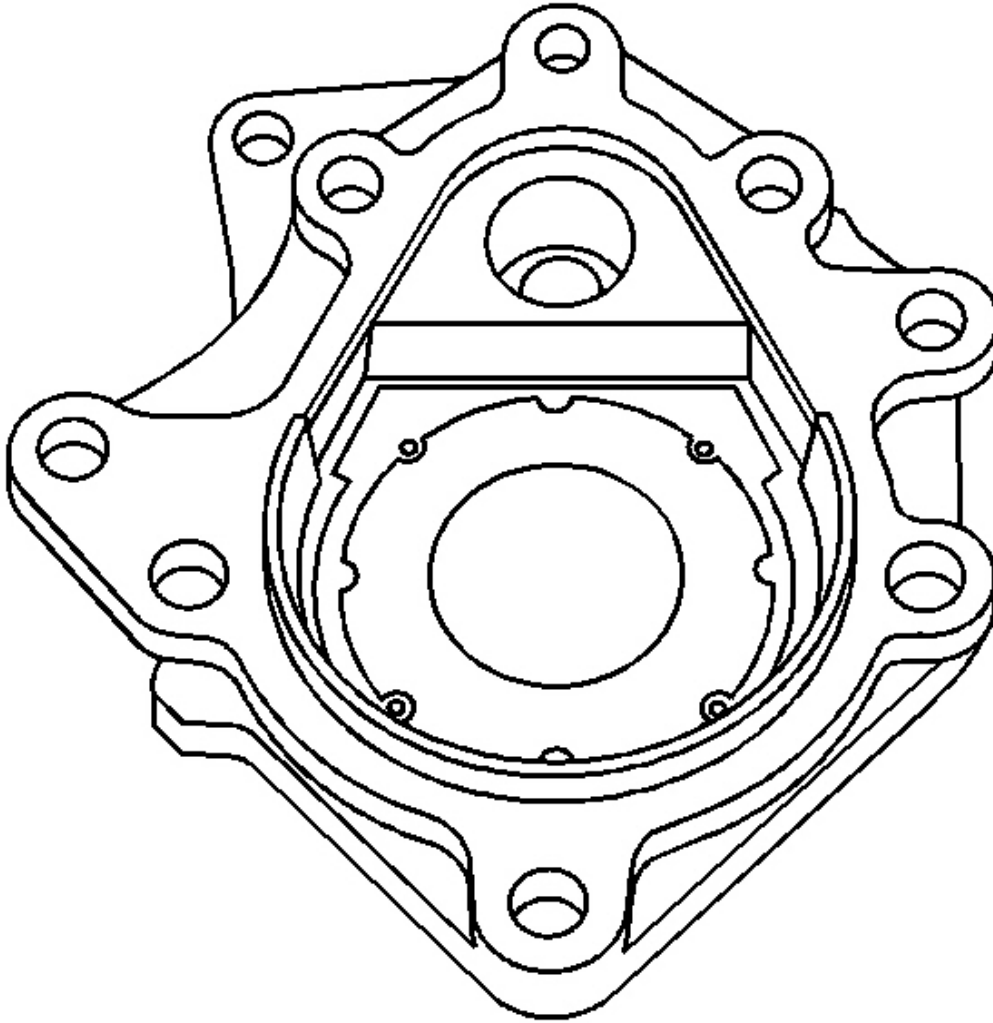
View Of Thrust Washer & Outer Intermediate Shaft Bearing Case Half
